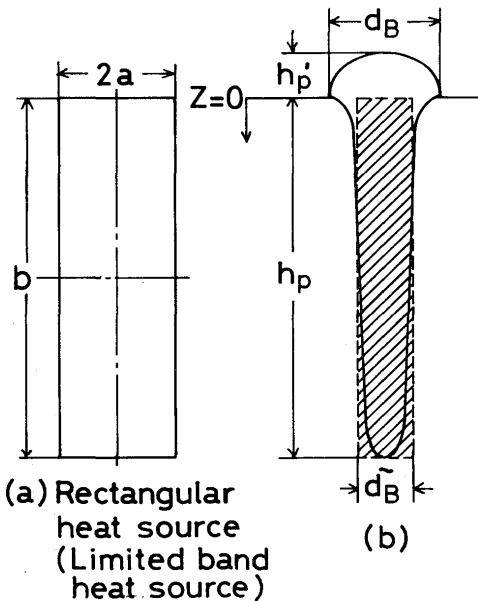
Relation between rectangular heat source and actual weld bead.
